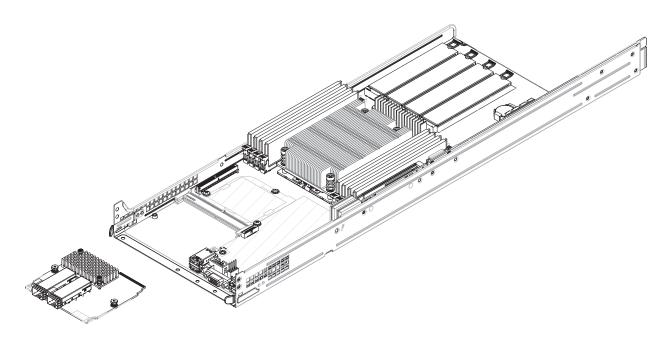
Insert the SIOM into the Motherboard Drawer
